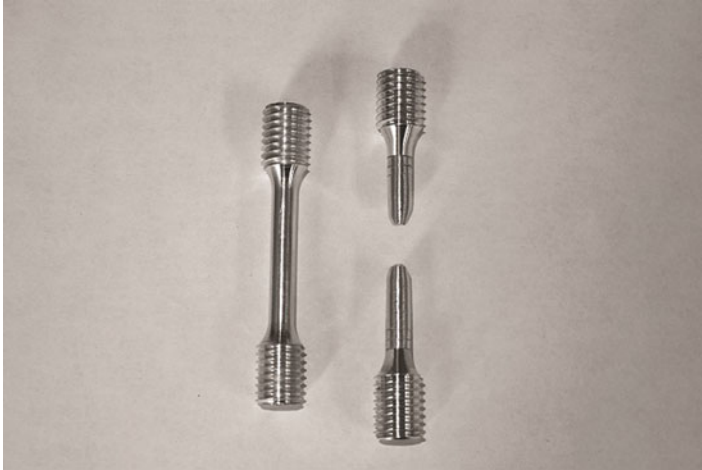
Tensile test specimen before and after testing showing in the tested specimen the necked region and location of final fracture. (Courtesy of Westmoreland Mechanical Testing and Research Inc.)
